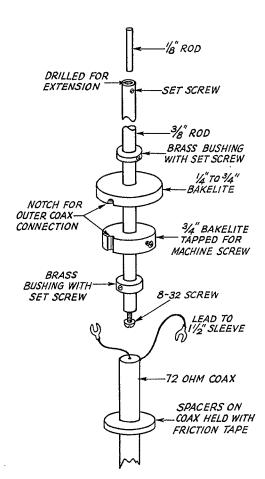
Exploded view showing the  $\frac{3}{16}$ -inch rod and method of assembling the pieces.
